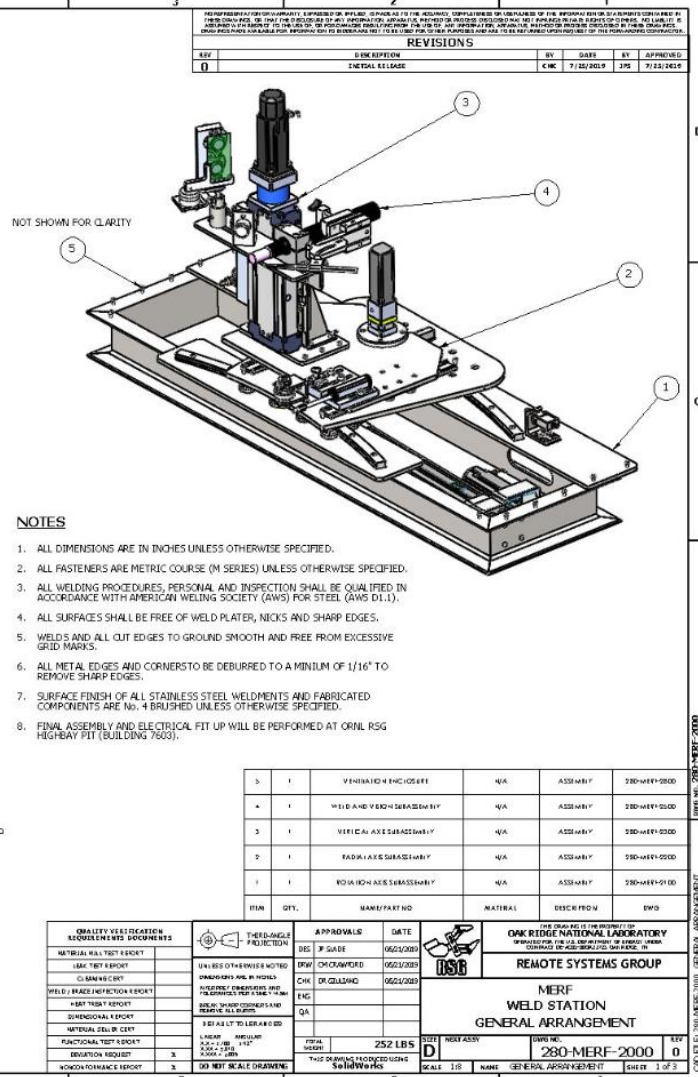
Sample engineering drawing showing key VRM details (dimensions in inches).
